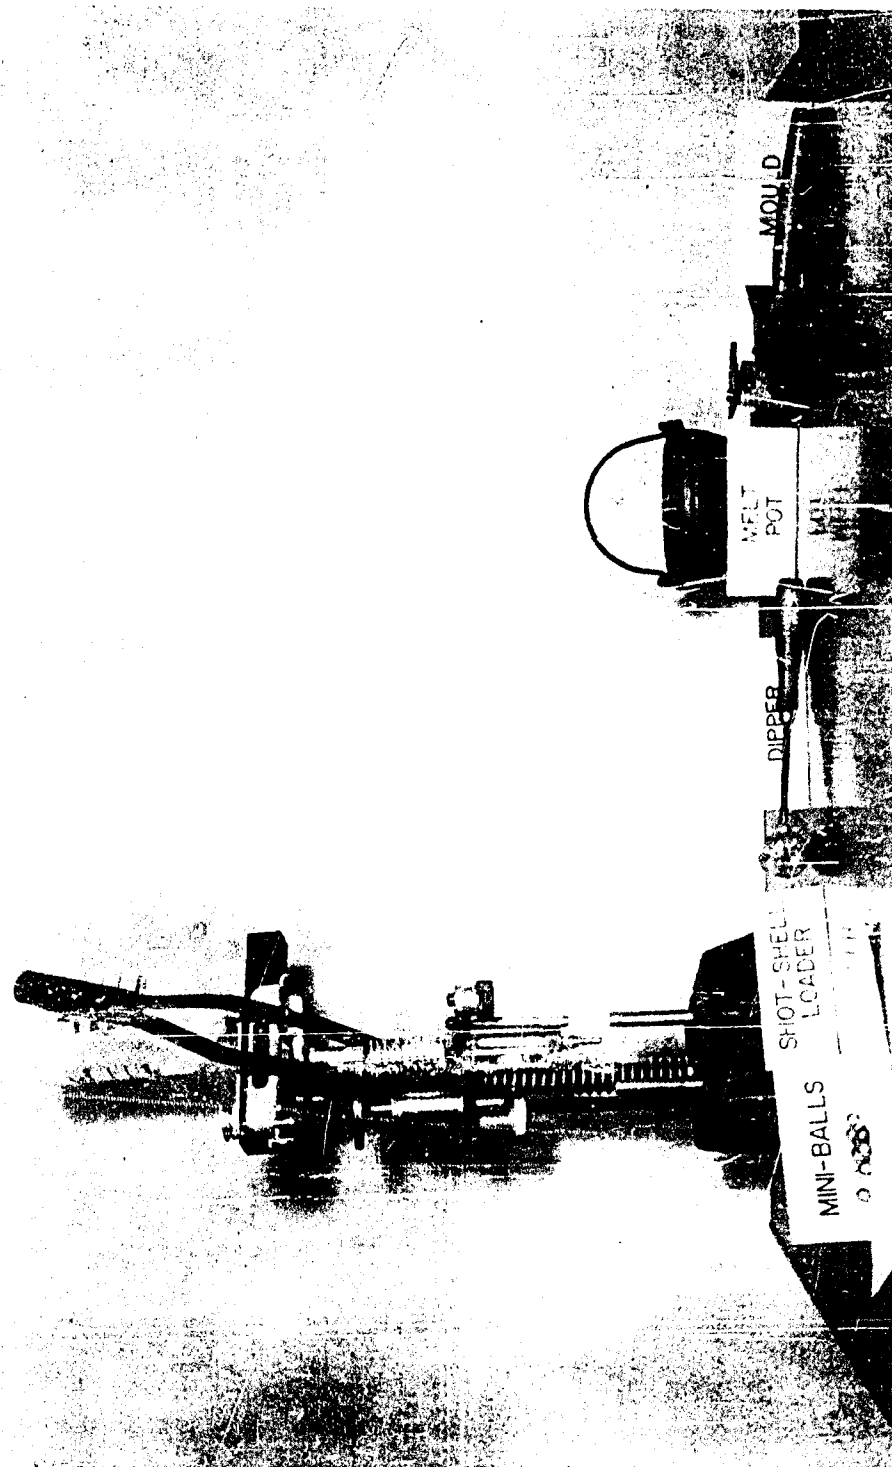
MOULDING AND SHOT SHELL LOADING EQUIPMENT
